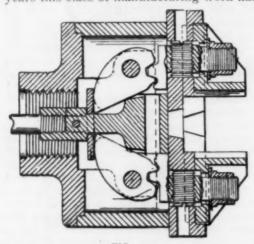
SECTIONAL VIEW OF CHUCK, SHOWING JAWS OPEN.
